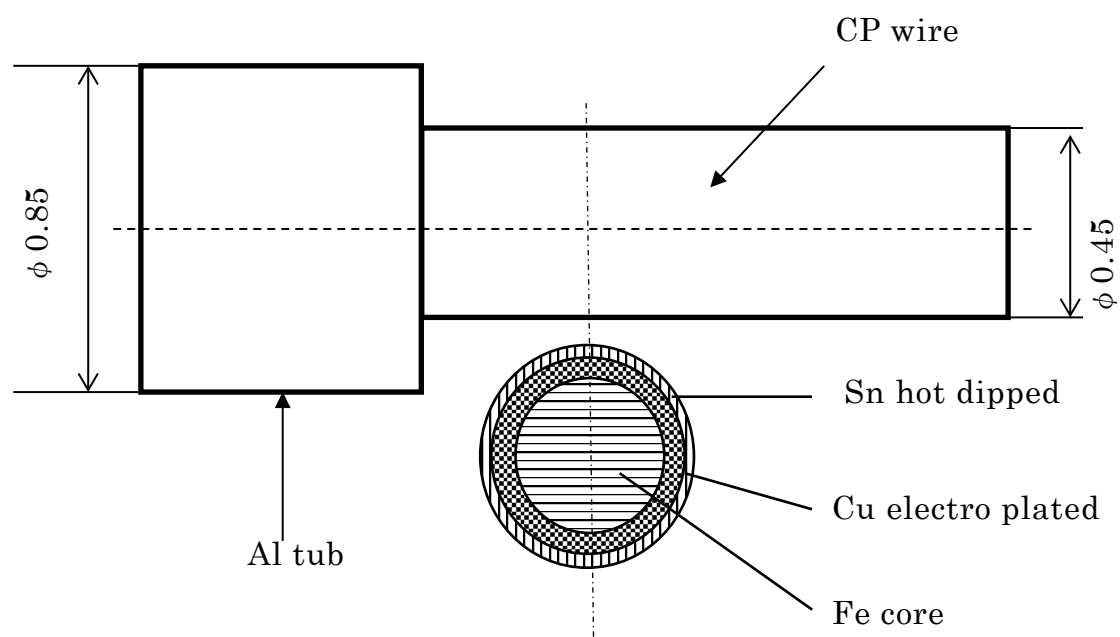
Electrical wire geometry. Welded structure with Al tub and CP wire which copper electronic plated and Tin hot dipped.
